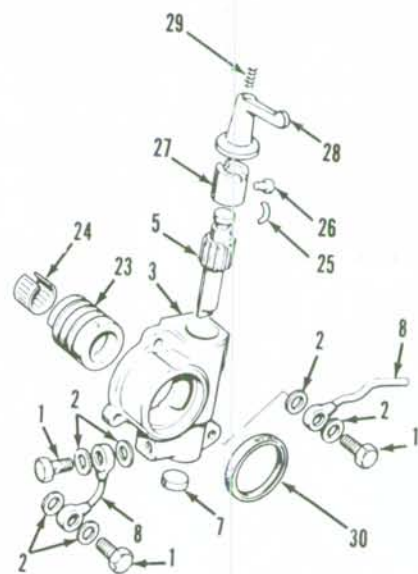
Exploded view of the manual oil pump used on Models 070S and Super Pro 70.
